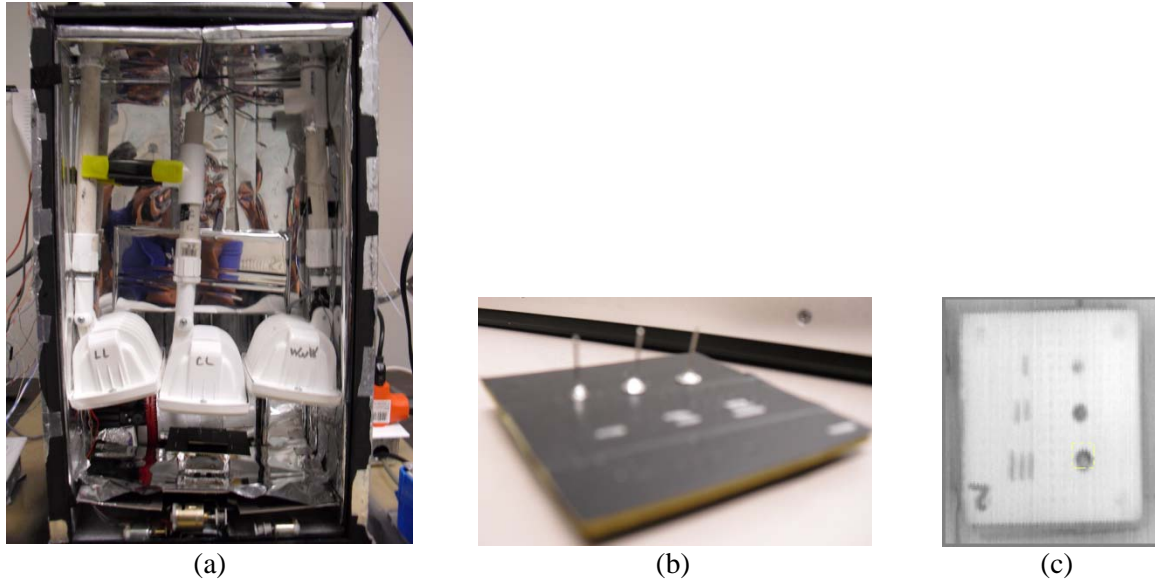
(a) Heating chamber; (b) printed circuit board (PCB) with solder joints with three different geometries; and (c) infrared image of PCB after heating experiment.
